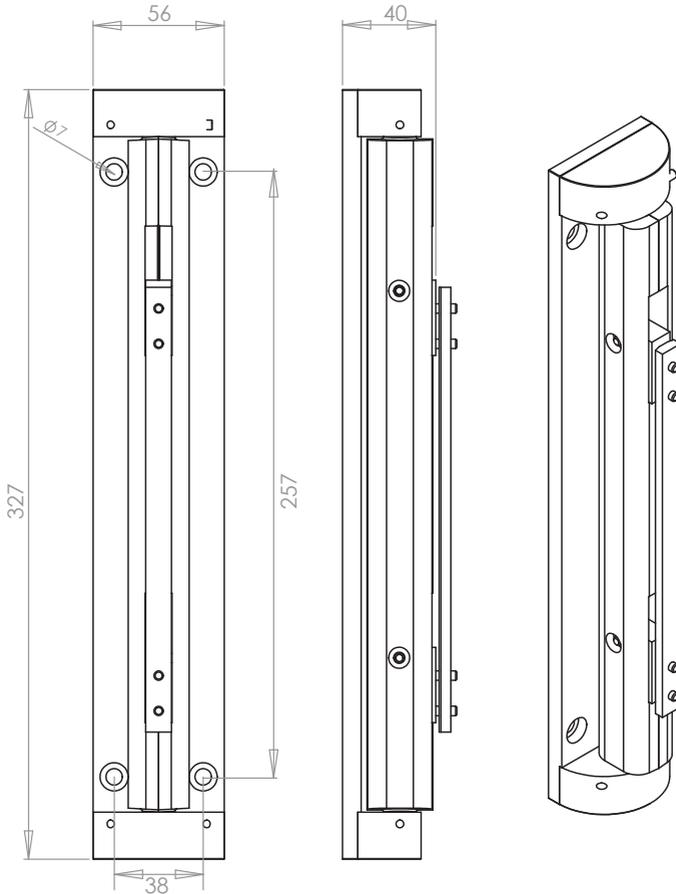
Fixing brackets for wall mounting of Ray-On+ columns
